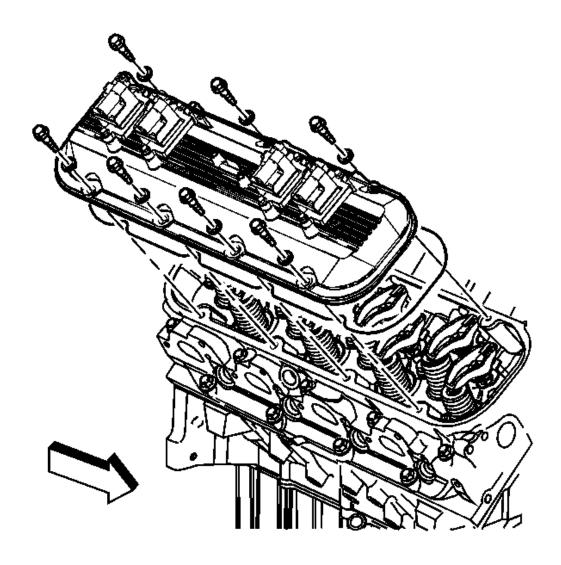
View Of Valve Rocker Arm Cover & Bolts (Right) Courtesy of GENERAL MOTORS CORP.
